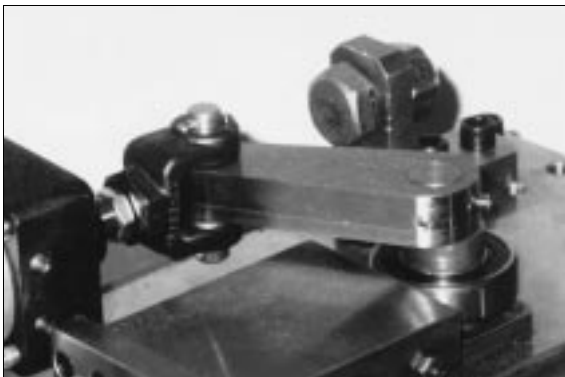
Arm and Cam system that drives the deformation chuck for outer ring deformation during bearing assembly.
